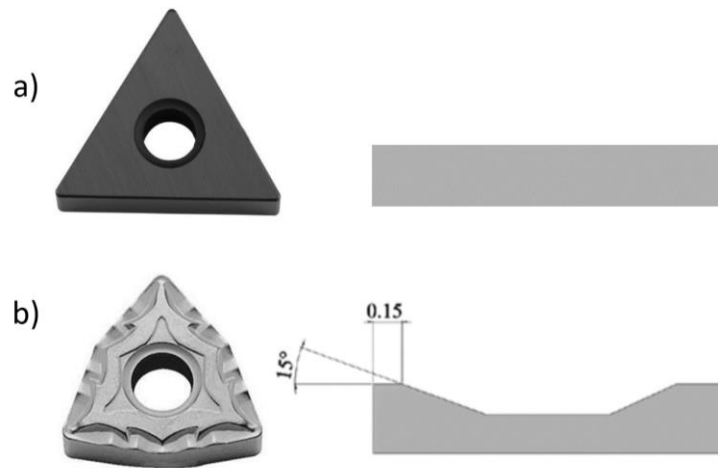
Cutting insert for turning operations showing cutting edge and rake cross-section: a) without and b) with chip breaker, adapted from [10].
